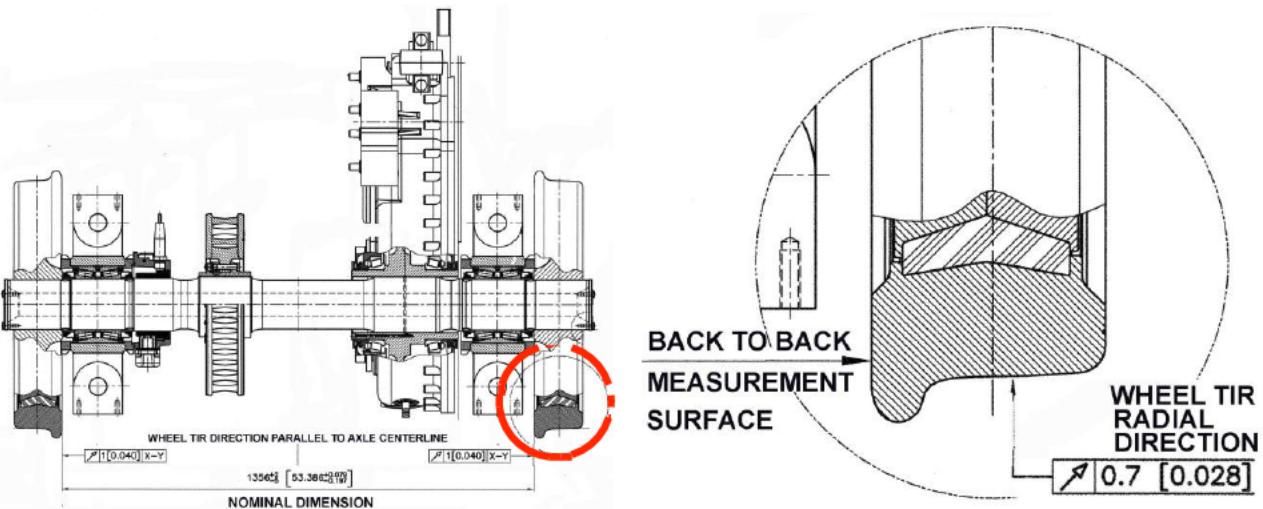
MOTOR TRUCK - WHEEL BACK TO BACK AND RUNOUT TOLERANCES
